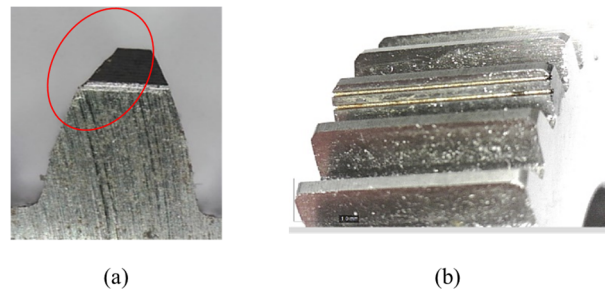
Artificial fault of the gear; (a) a gear with tooth wear, (b) a gear with spall
